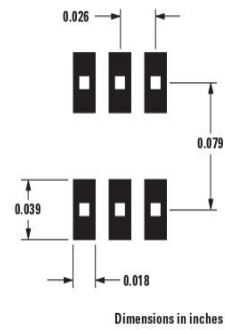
Recommended PCB Pad Layout for Avago's SC70 6L/SOT-363 Products.
